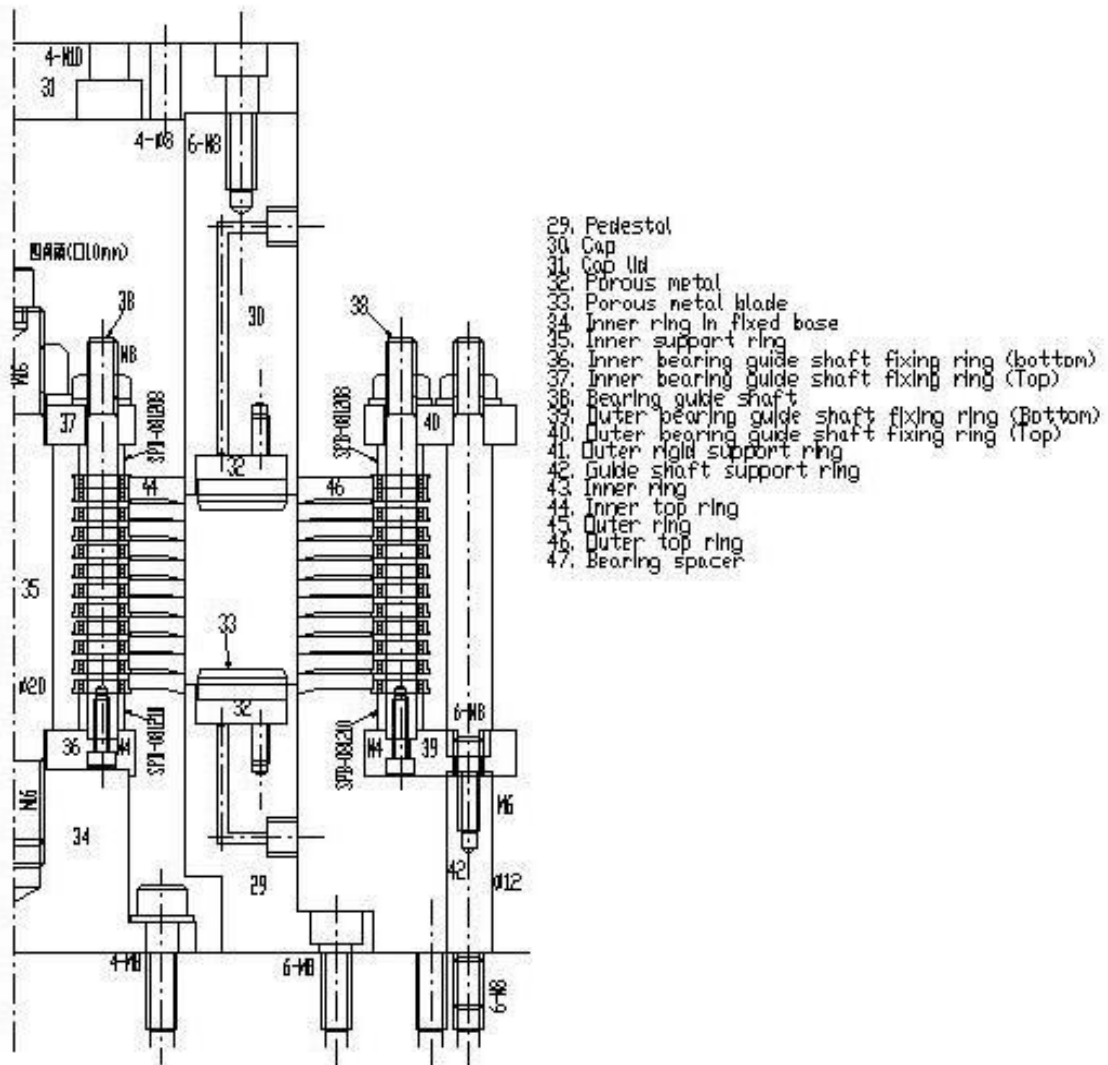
Schematic figure of 11 stacked-ring shear type
